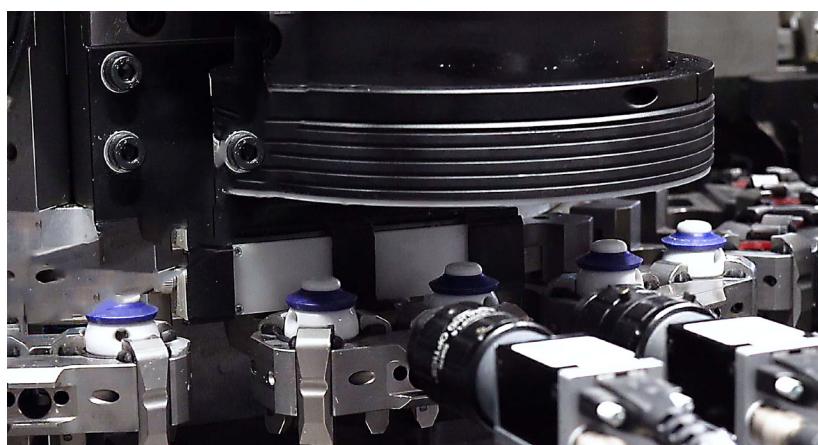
The inspection system checks bottle caps for cracks and flaws.
